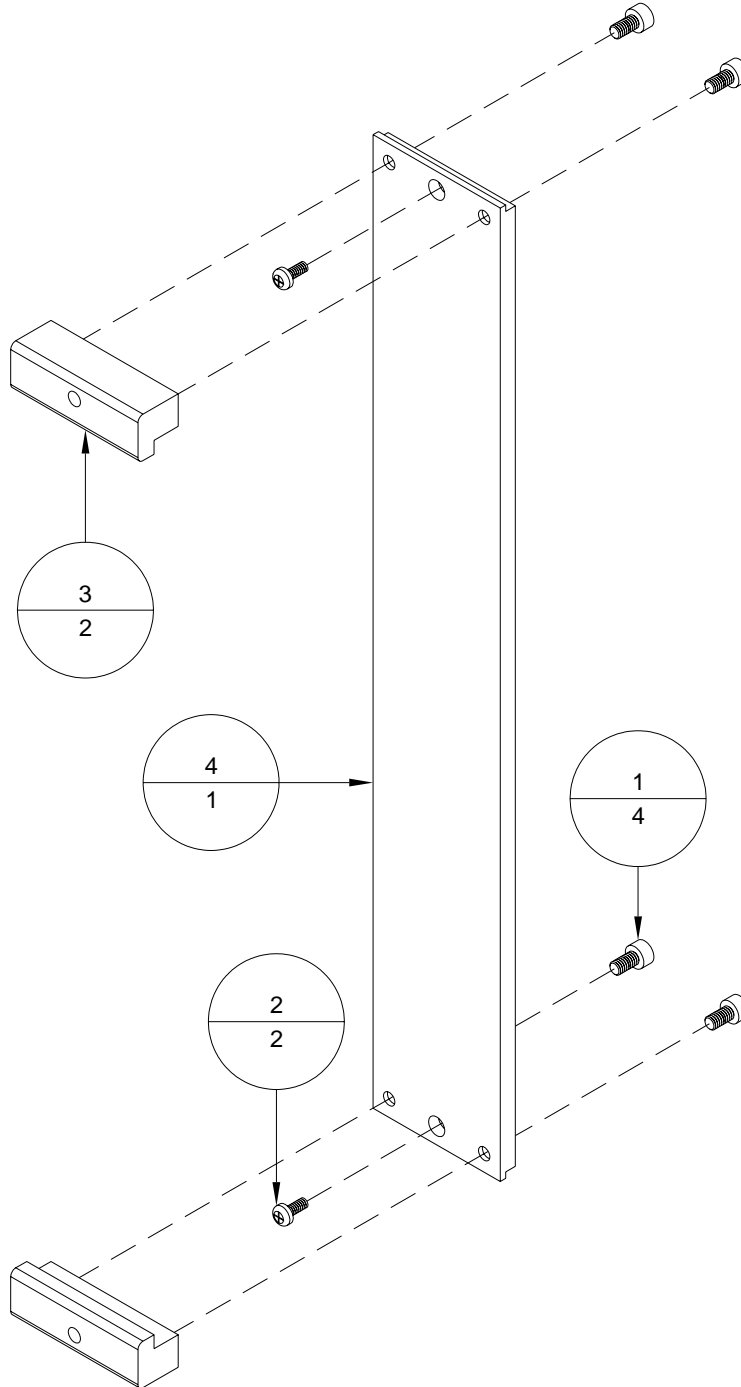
Cover Assembly, Blind Card, BK1700 (9103455A)
